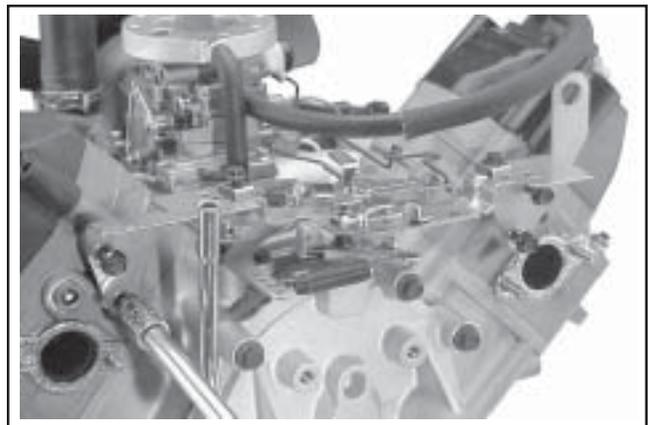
Removing the Four Screws From Main Control Bracket.
